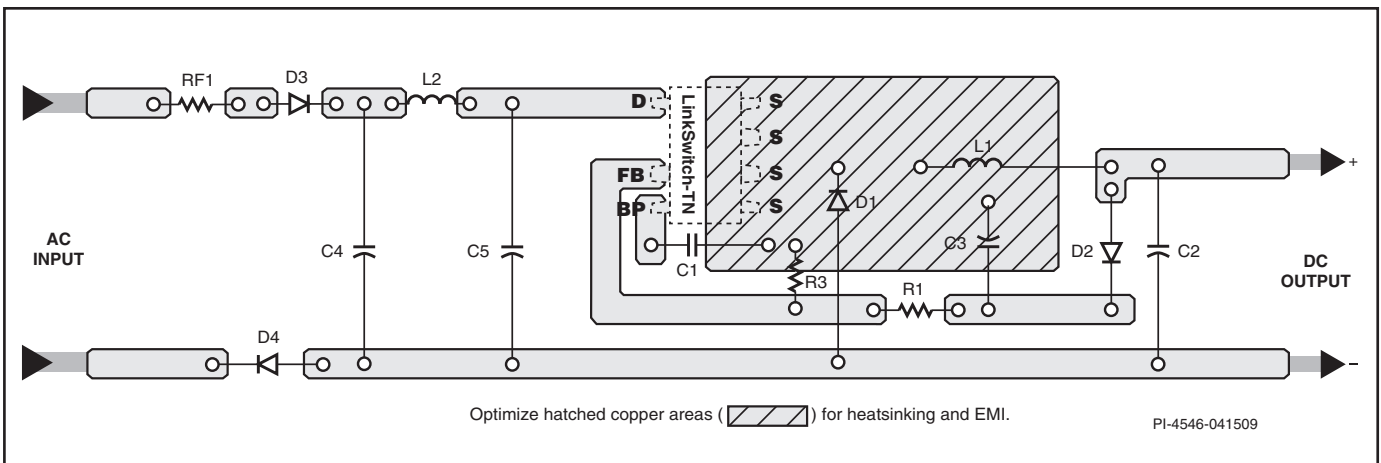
Recommended Printed Circuit Layout for LinkSwitch-TN in a Buck Converter Configuration using D Package to Bottom Side of the Board.
